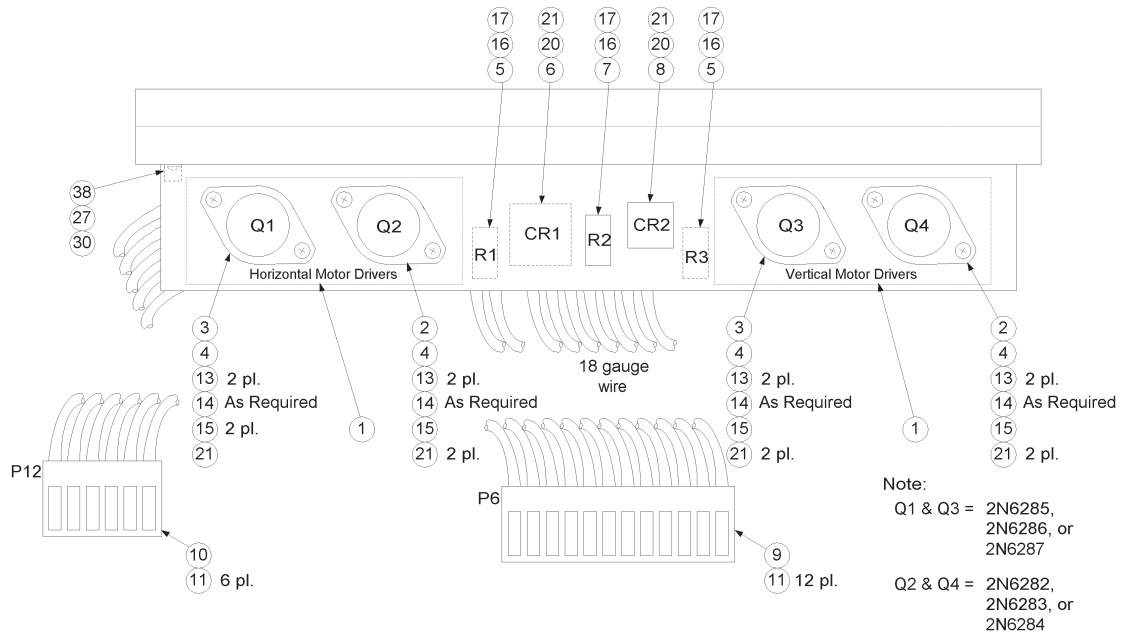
MOTOR DRIVER HEATSINK ASSEMBLY EXPLODED VIEW
